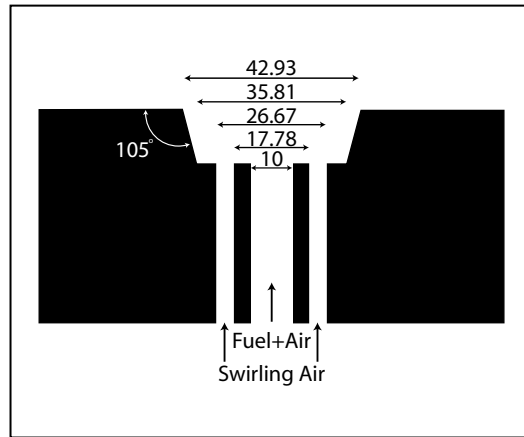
Details of the calibration burner. All dimensions are in mm.
